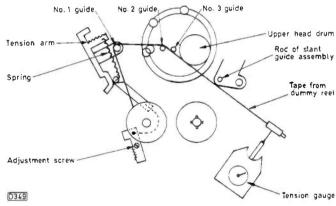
Video-8 back-tension measurement. You use a fantype tension gauge and dummy reel.
